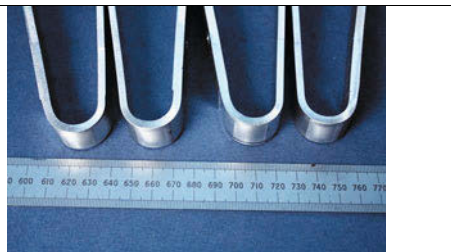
Bend test results of a dissimilar thickness weld showing 180° passes on both top and bottom
